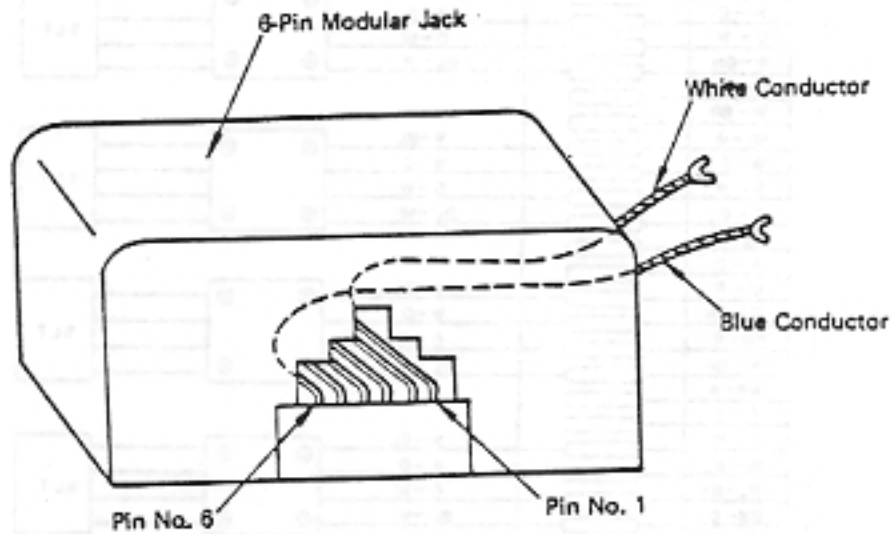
A Six-Pin Modular Jack Construction
